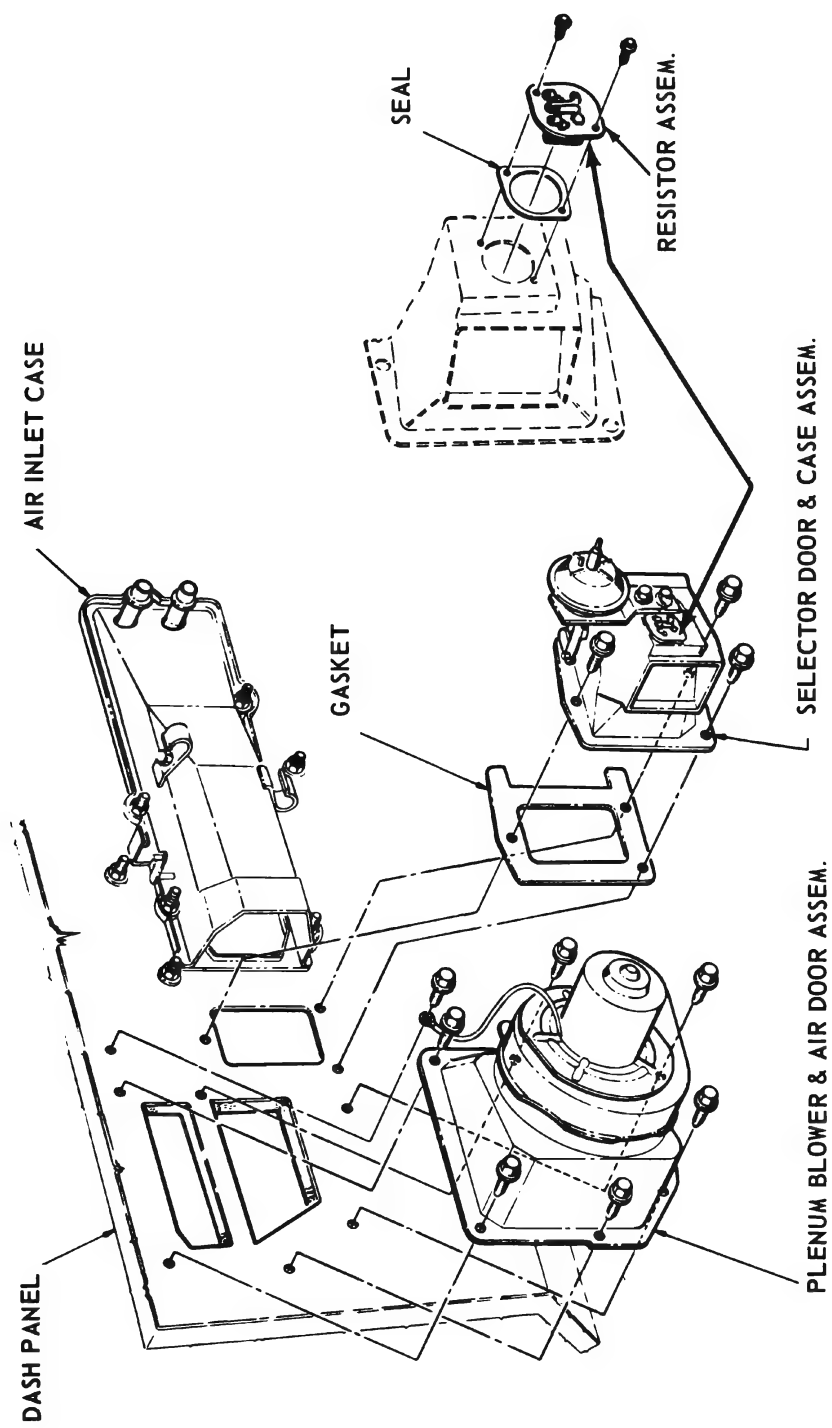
Plenum Blower and Air Door Assembly, and Selector Door and Case Assembly Installation - 4700 Series
